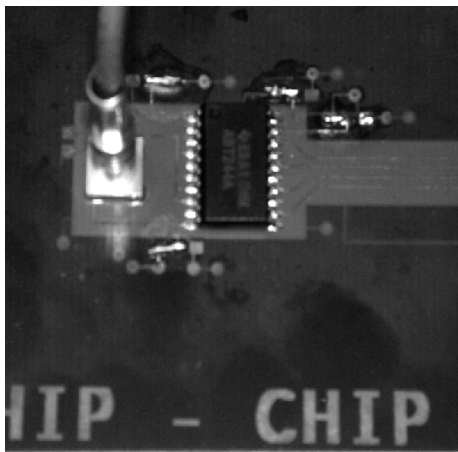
Photograph of Fabricated and Assembled SOP SSN Test Coupon
